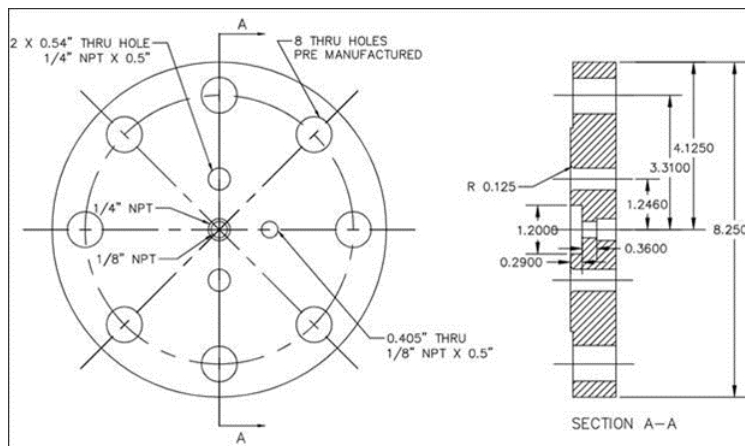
Hydraulic connections machined into the cover of the compression chamber for the first prototype.
